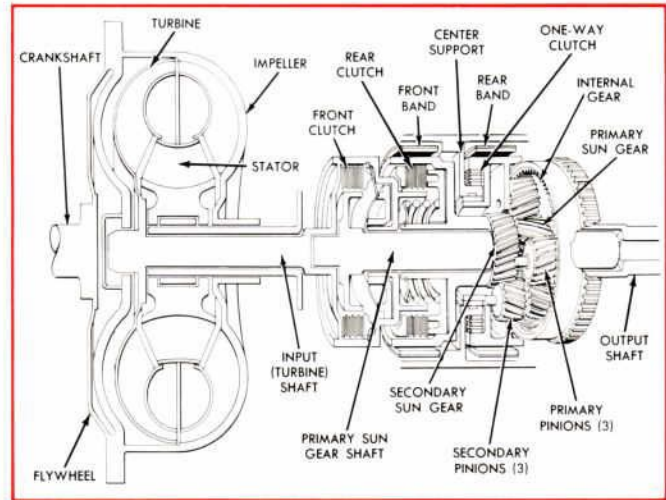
The FMX Planetary Gear Train, Bands, and Clutches
